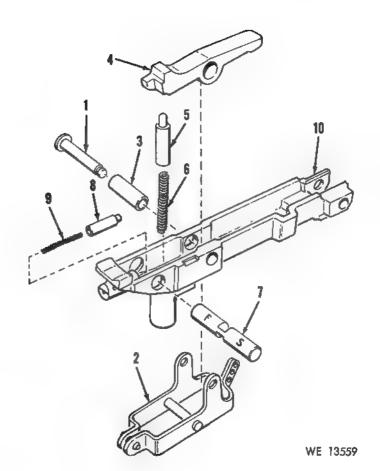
Sear and Safety Housing Assembly-Exploded View.
